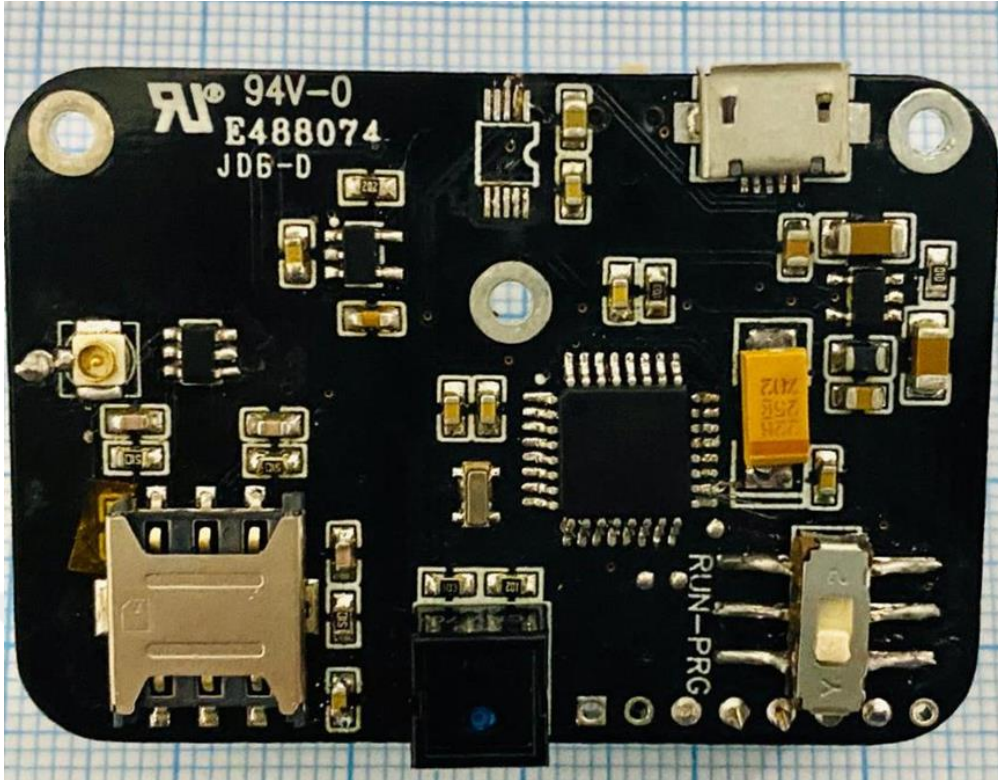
The Printed Circuit Board of The Designed Bracelet (Bottom Side).
